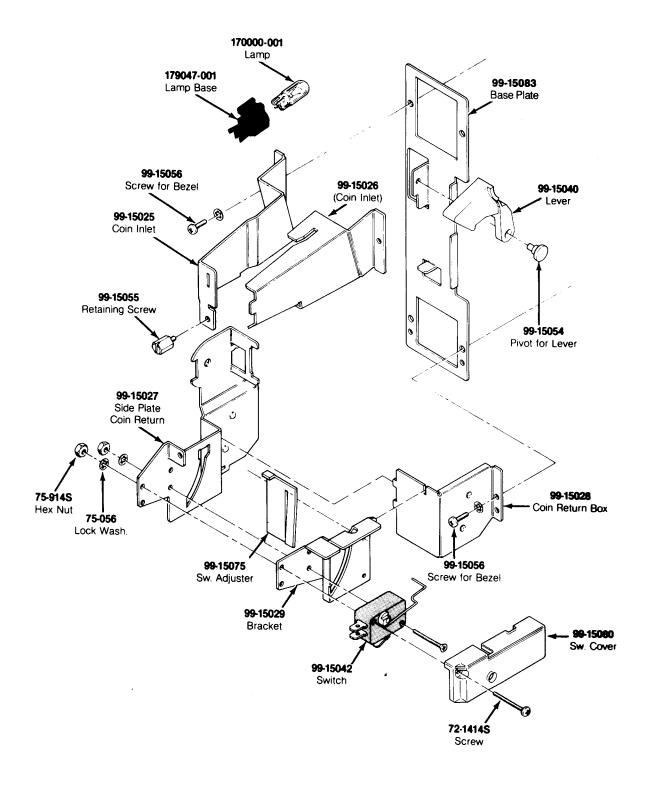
Vertically Mounted Coin Door 171034-xxx A
